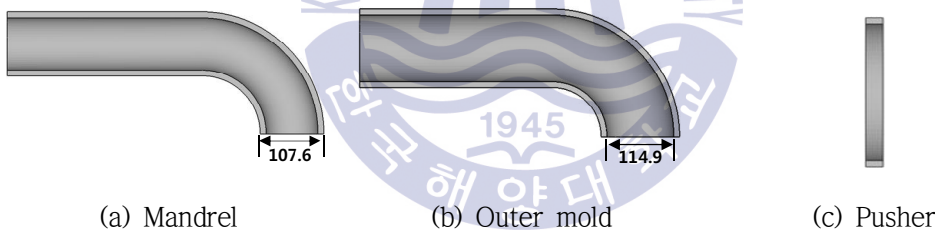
Shape and dimension of dies (model of tolerance 0.3 mm)
